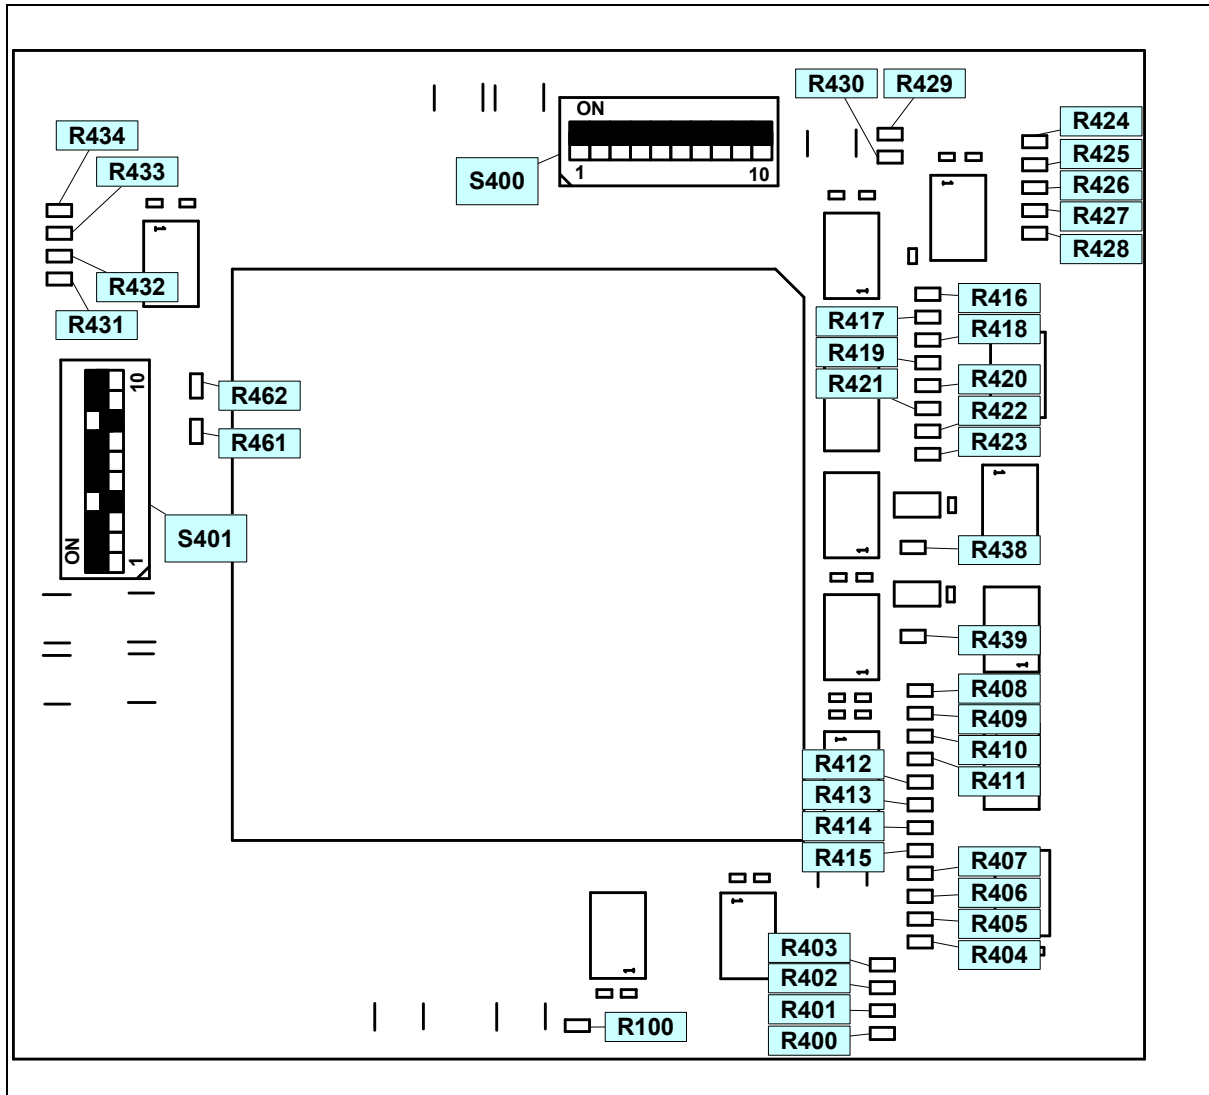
Jumper location, bottom. Refer to chapter 4 for version differences
